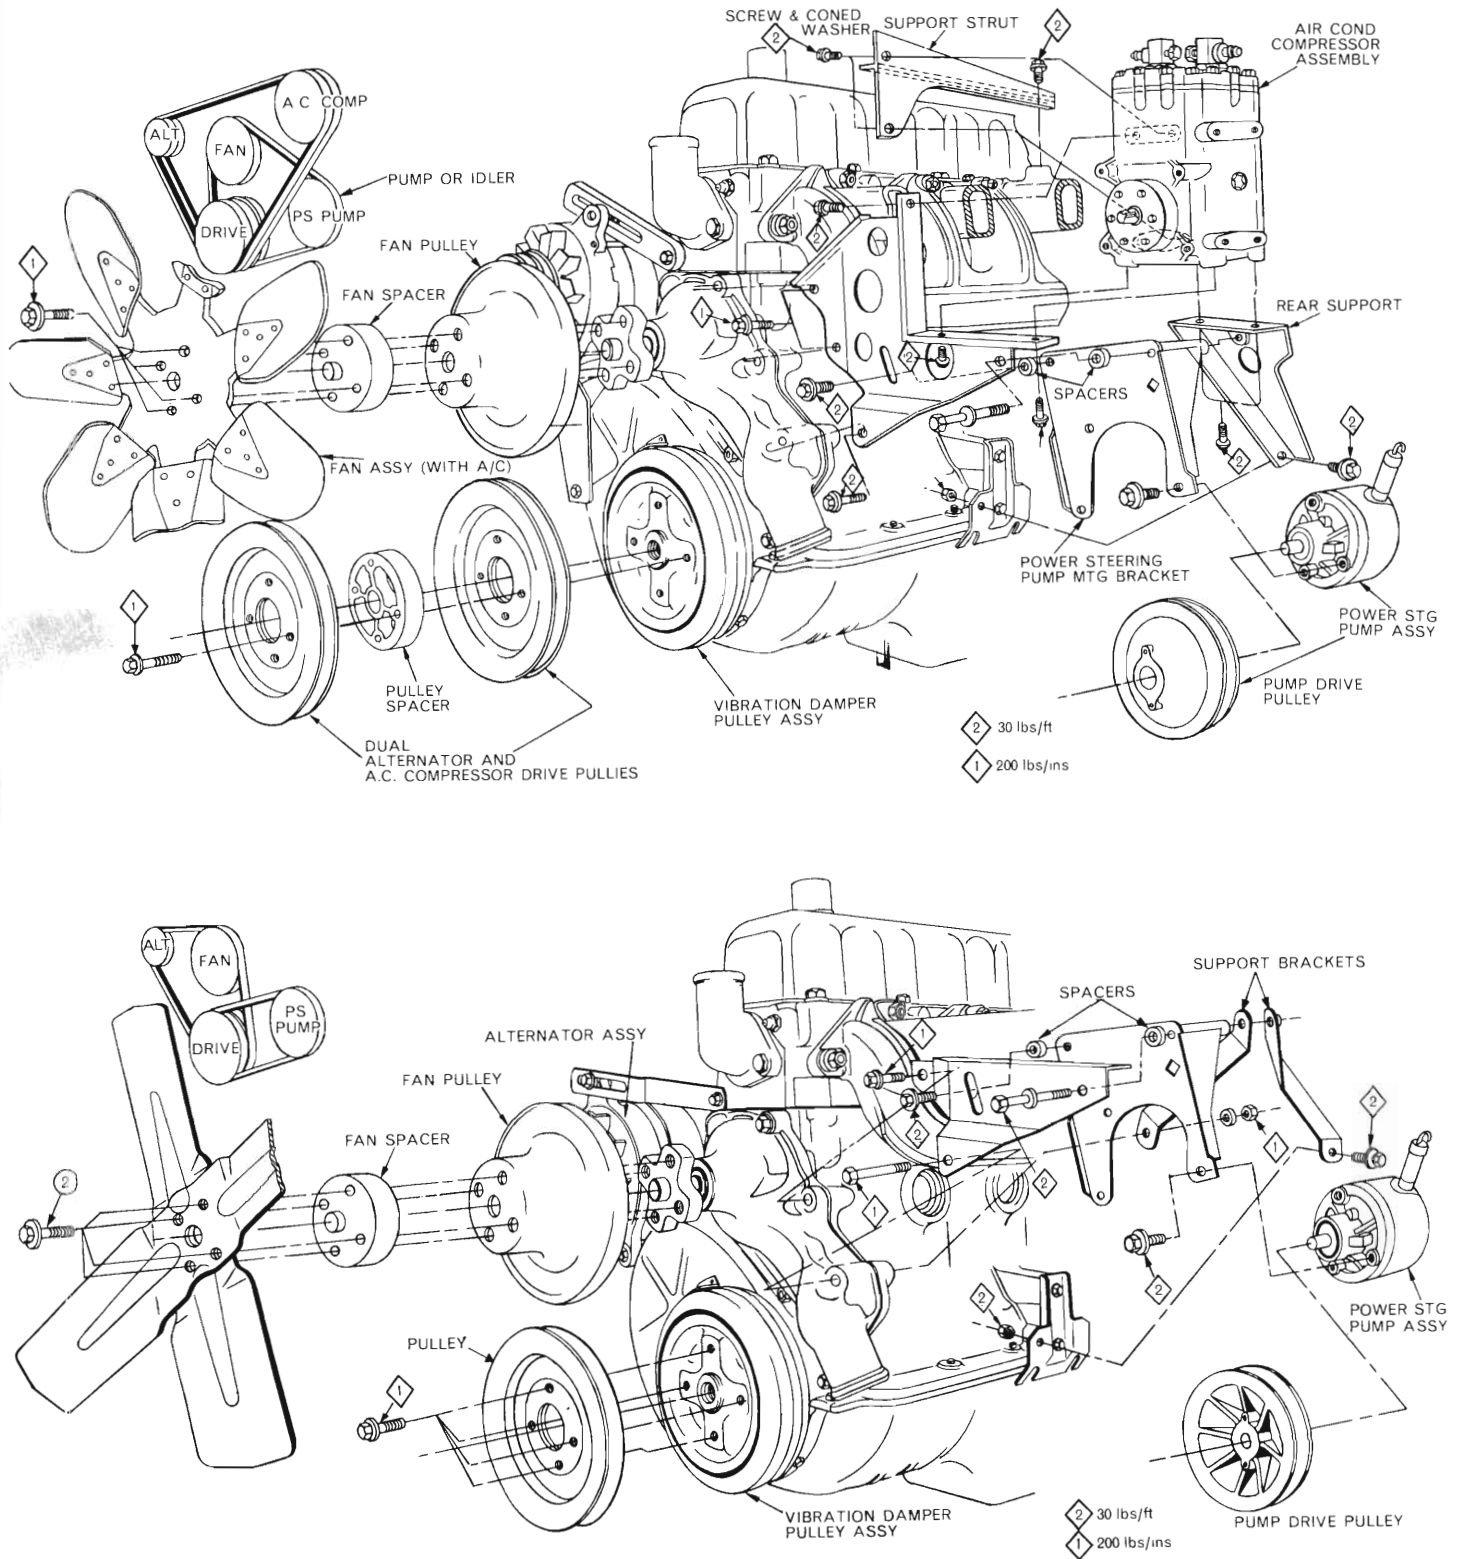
6 Cylinder Accessory Drive Belt Layout
